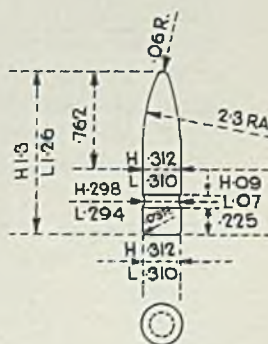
A — Dimensions and tolerances of completed bullet
